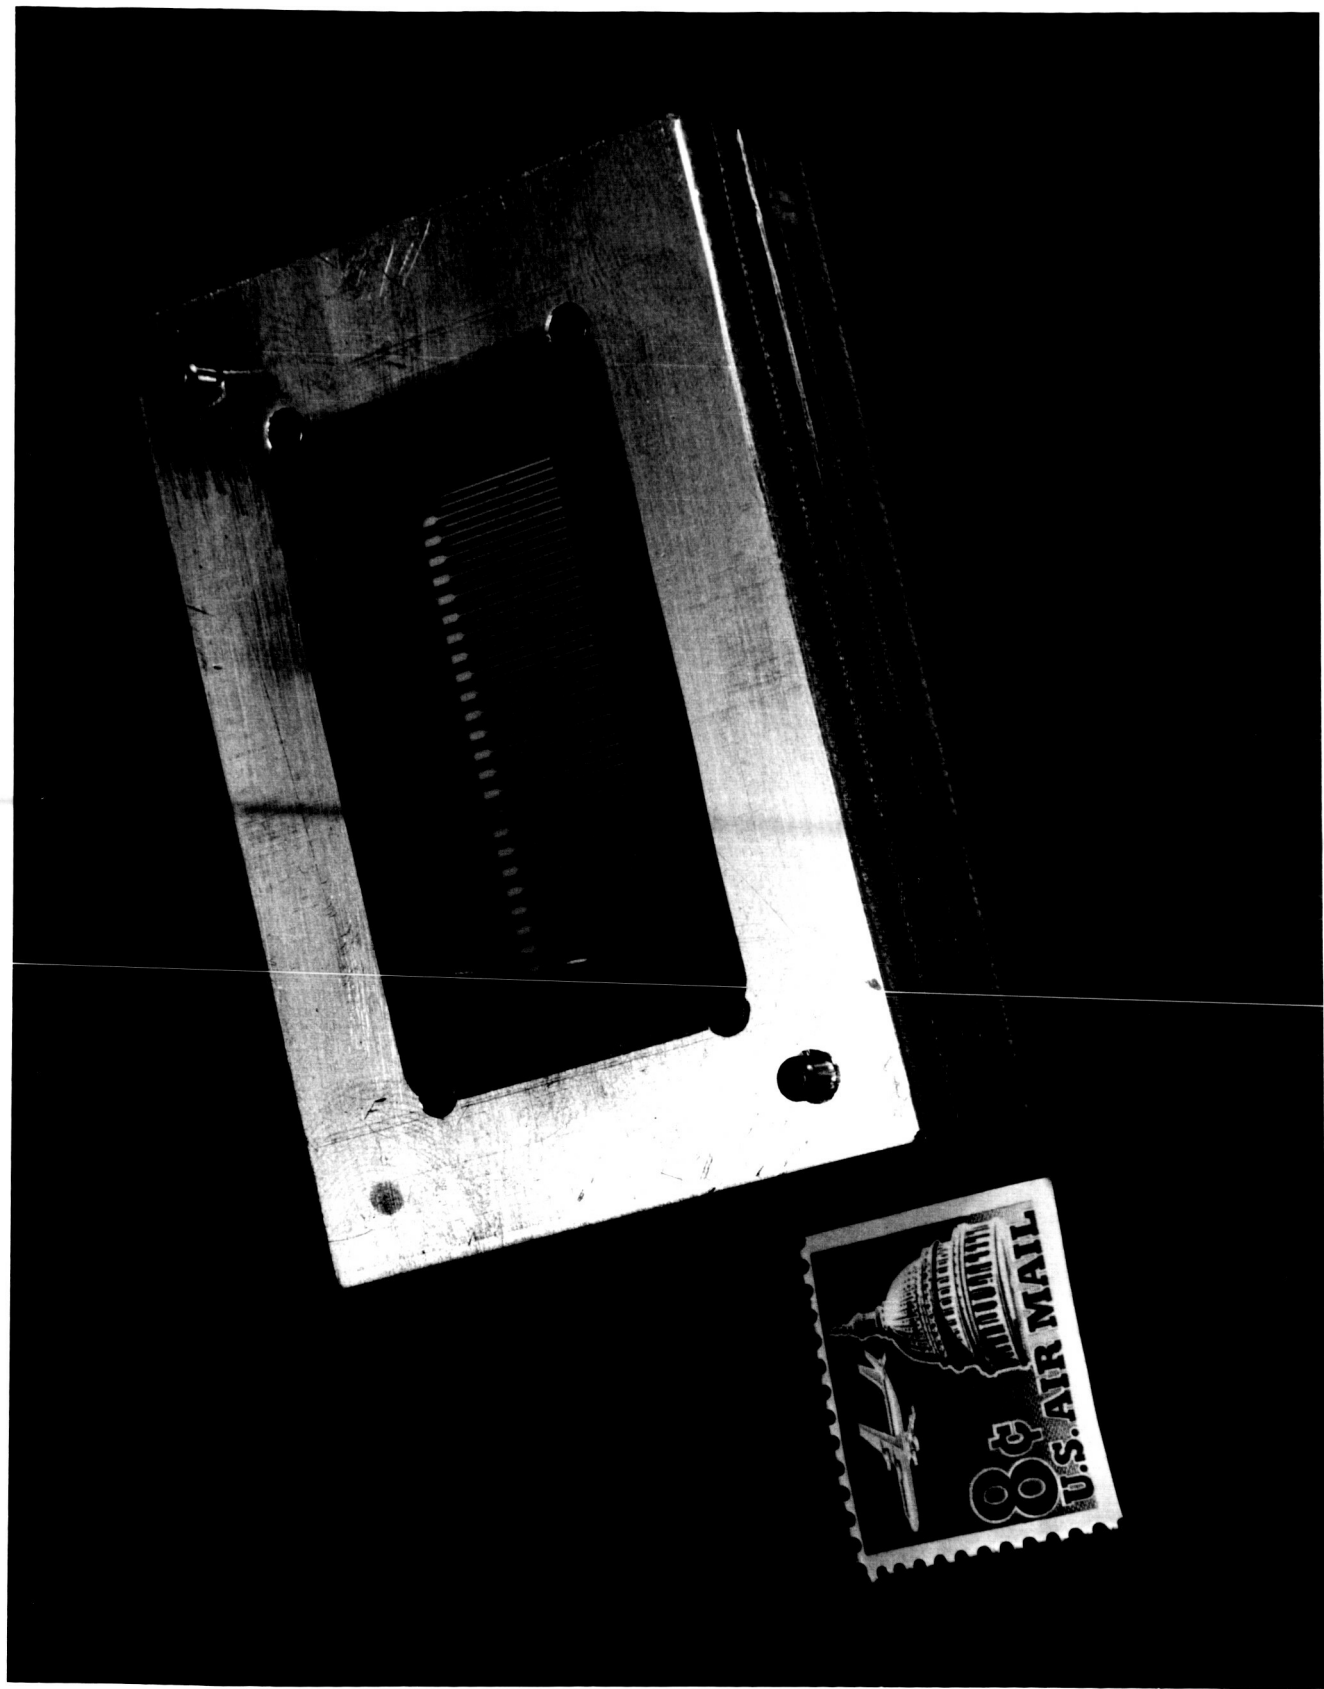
PROTOTYPE GRID WITH MASK IN DEPOSITION FIXTURE
